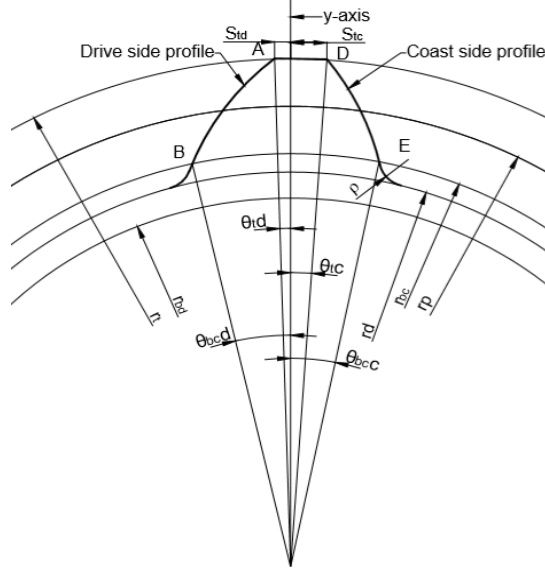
Involute profile of asymmetric spur gear tooth
